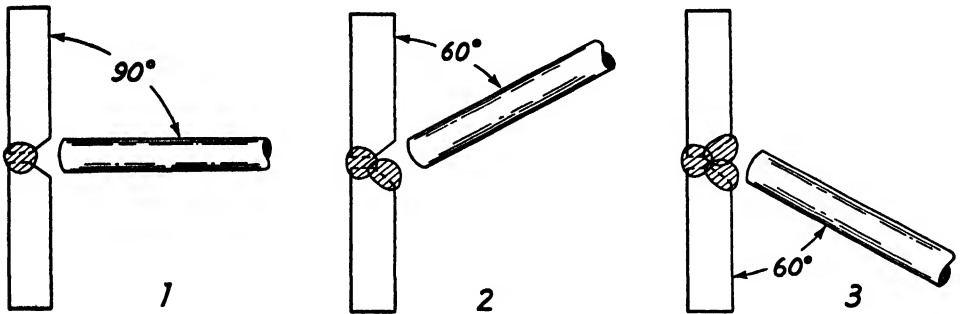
Steps in making a multiple-pass grooved weld in horizontal position.
